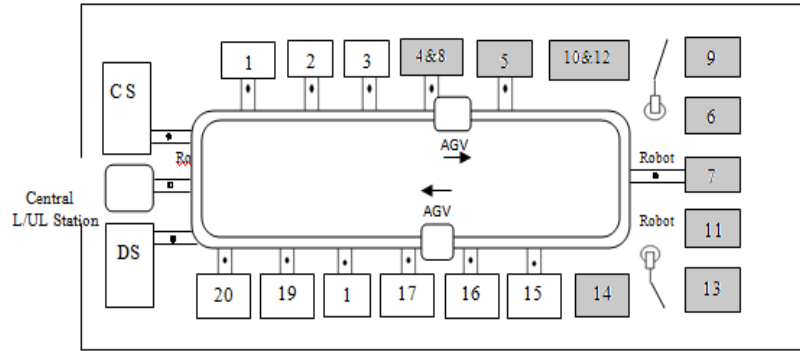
Layouts of machines in alternative C (After removing the surplus machine)
